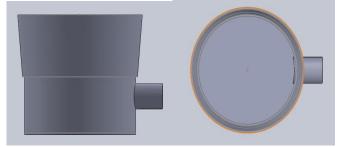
Air Inlet Pipe at 0° Cooling Tower Model
